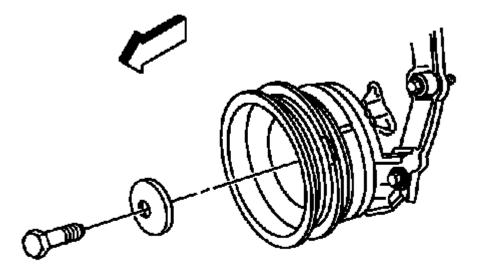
View Of Crankshaft Balancer Washer & Bolt Courtesy of GENERAL MOTORS CORP.
